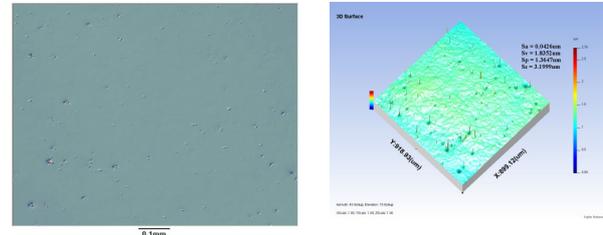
White light interferometer surface topography of Inconel 718 before micro-touch
